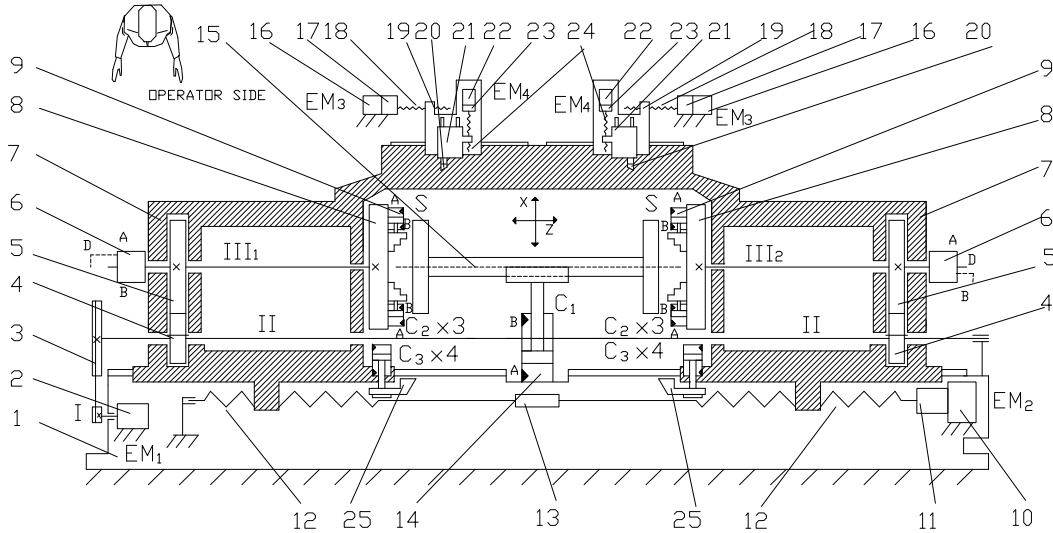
Kinematic-structural diagram of the lathe: 1 – bed with guides, 2 – EM1 electric motor of the main drive, 3 – V-belt drive; 4, 5 – gears, 6 – rotary coupling, 7 – slides, 8 – chuck plate, 9 – hydraulic jaws; 10 – EM2, electric motor for relative positioning; 11 – reducer; 12 – trapezoidal screws; 13 – coupling; 14 – hydraulic lifting /lowering of blank/workpiece; 15 – blank/workpiece, 16 – EM3 electric motors for feed on axis X; 17 – backlash free reducers; 18 – ball screws; 19 – slides on axis X; 20 – cutting tool (special turning cutters), 21 – slides on axis Z; 22 – EM4 feed drive electric motors on axis Z; 23 – backlash free reducers; 24 – ball screws; 25 – hydraulic blocking claws; C1 – cylinder of system 14; C2 – claws driving cylinders, C3 – cylinders for actuating claws 25; I, II, III, III₁, III₂ – shafts; S – processed surfaces; X, Z – CNC axes having the possibility of working with interpolation.
